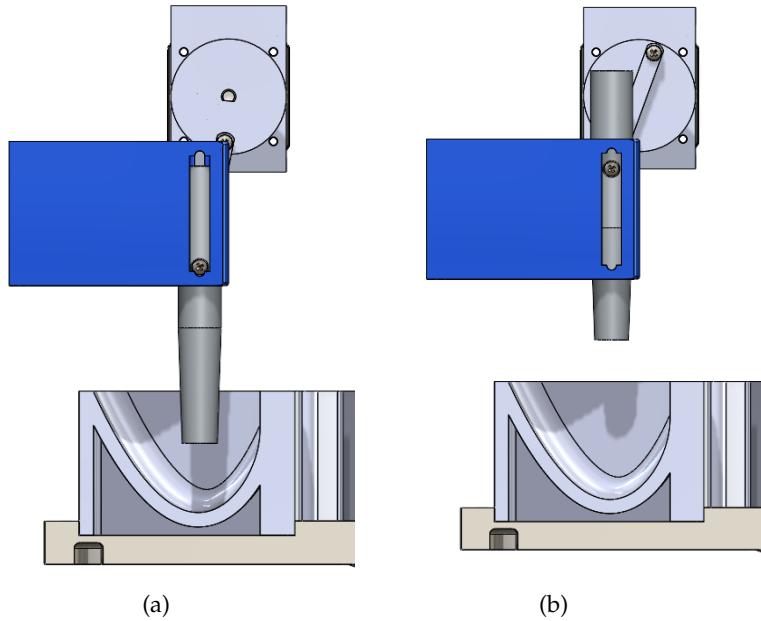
Final pipe end mechanism when the pipe is in its lowest and the highest positions.
